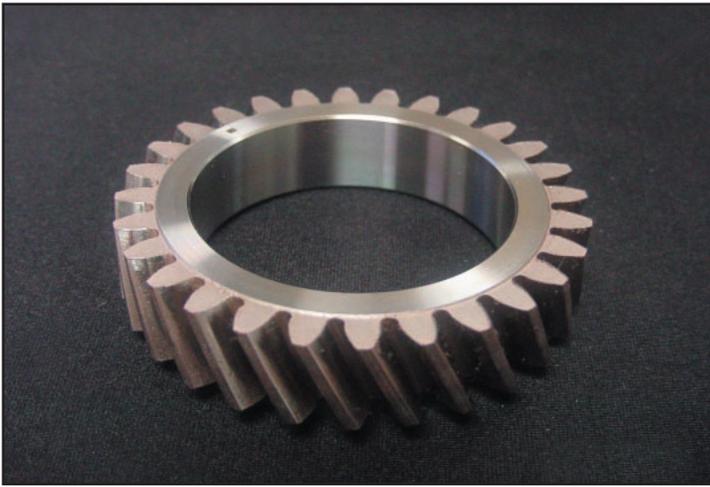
Copper Infiltrated P/M Crankshaft Gear
